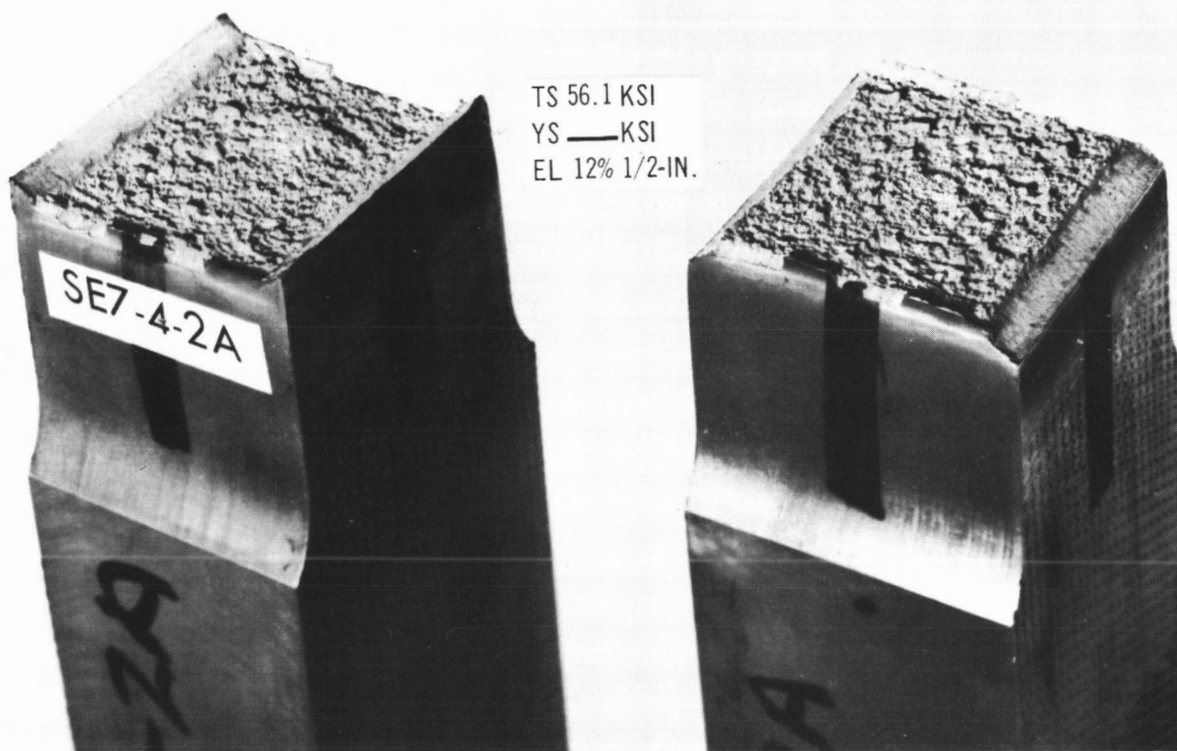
FRACTURED FULL THICKNESS TENSILE SPECIMEN IN 2-3/8-IN. THICK EB WELDED 2219 PLATE.
